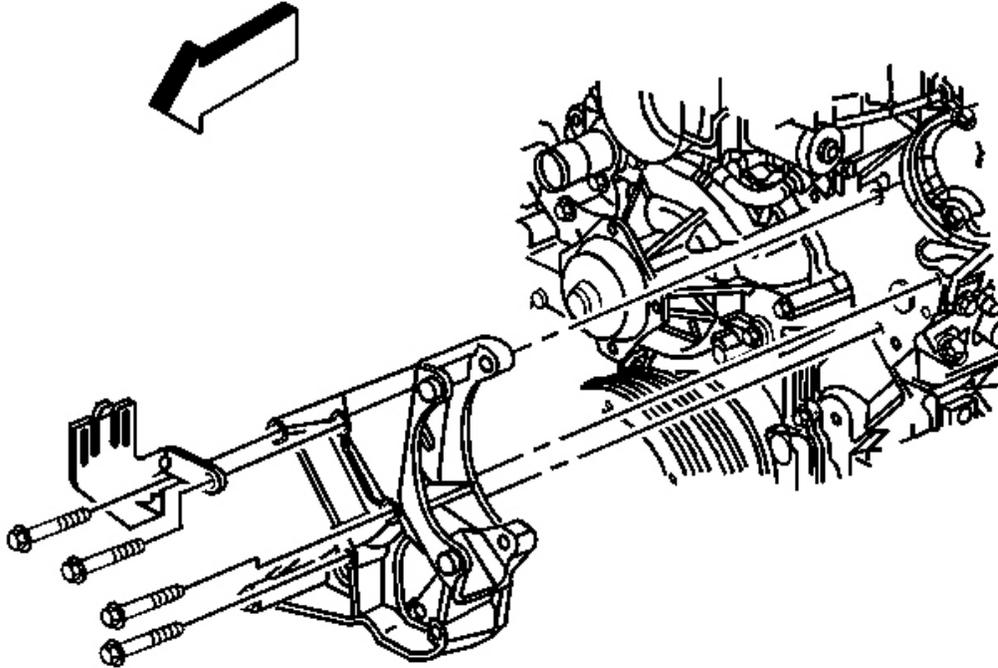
Generator Bracket Bolts & Power Steering Reservoir Bracket
